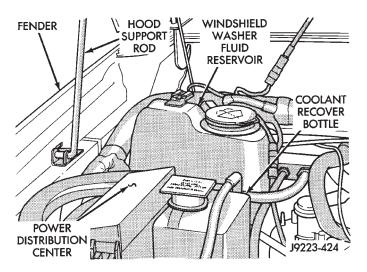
Coolant Recovery Bottle, Windshield Washer Fluid Reservoir & Hood Support Rod
